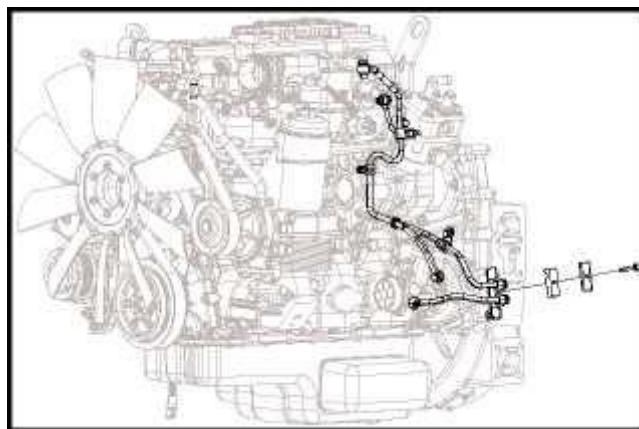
Drawings to remove low pressure oil pipe assembly
